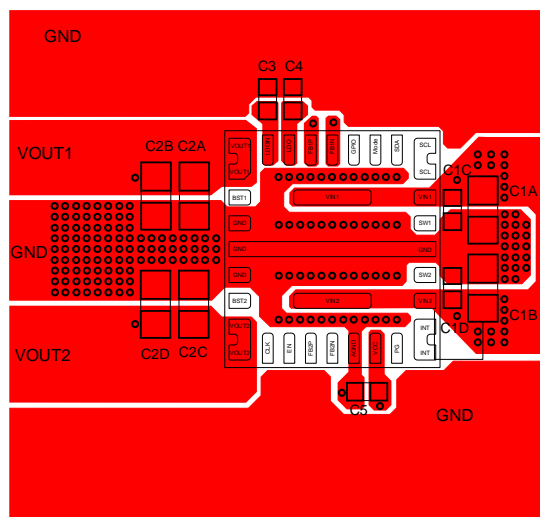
Recommended PCB Layout (Placement and Top Layer)
